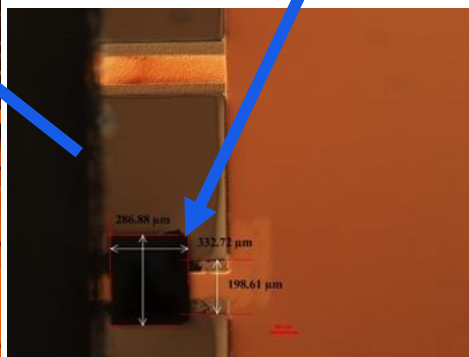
(a) Glass Laser Ablation Machine view)
